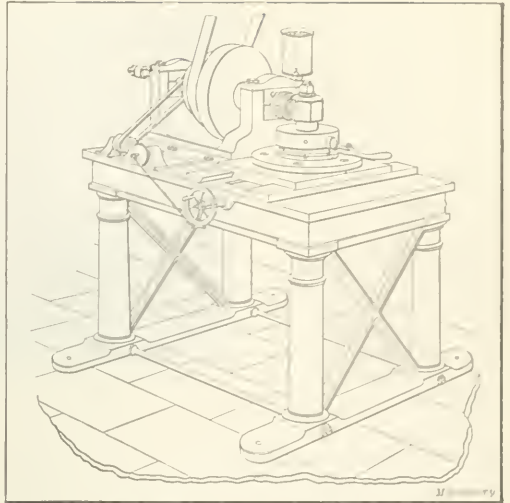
Index Milling Machine designed and built by Nasmyth about 1830
